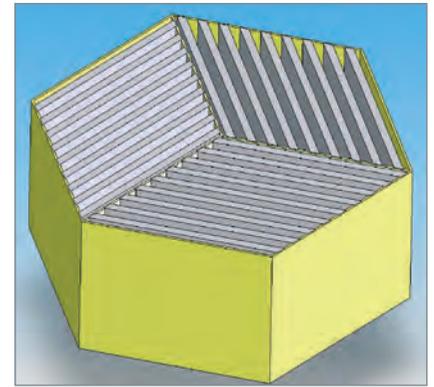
Cutaway view of a GFR hexagonal fuel assembly.
